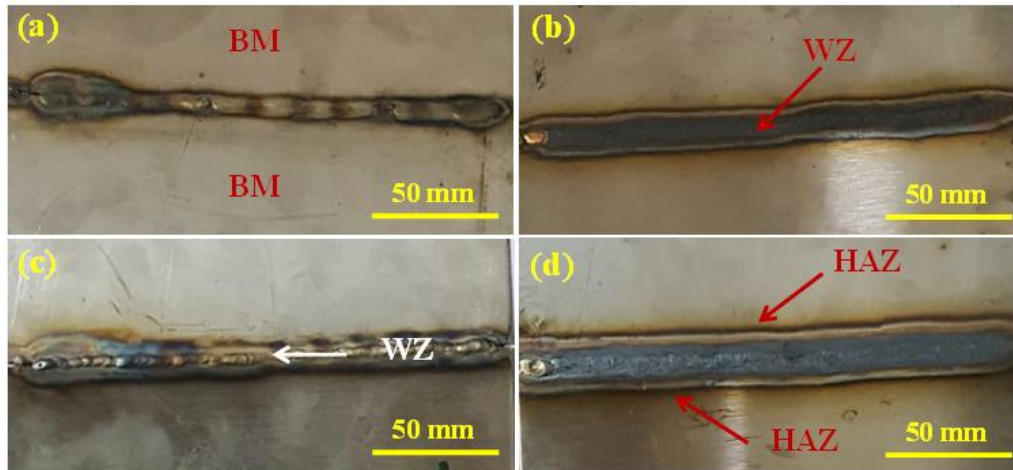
The welded joints between stainless steels 304 and 304L at different welding conditions (a) ER309 and 70 A (b) ER309 and 80 A (c) ER304 and 70 A (d) ER304 and 80 A
